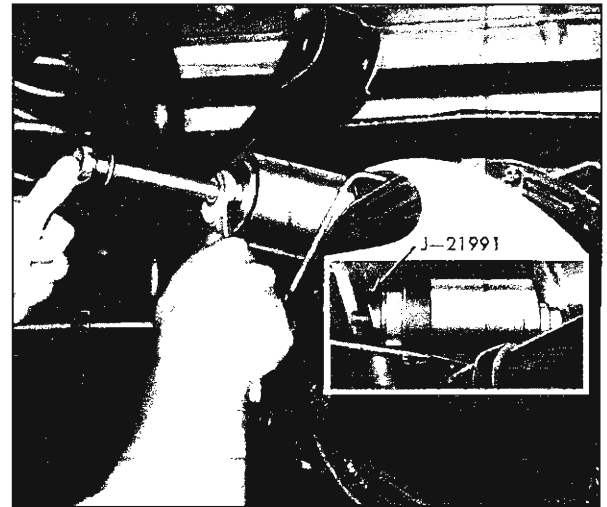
Carrier Mounted Suspension Bushing Removal (Heavy-Duty)
